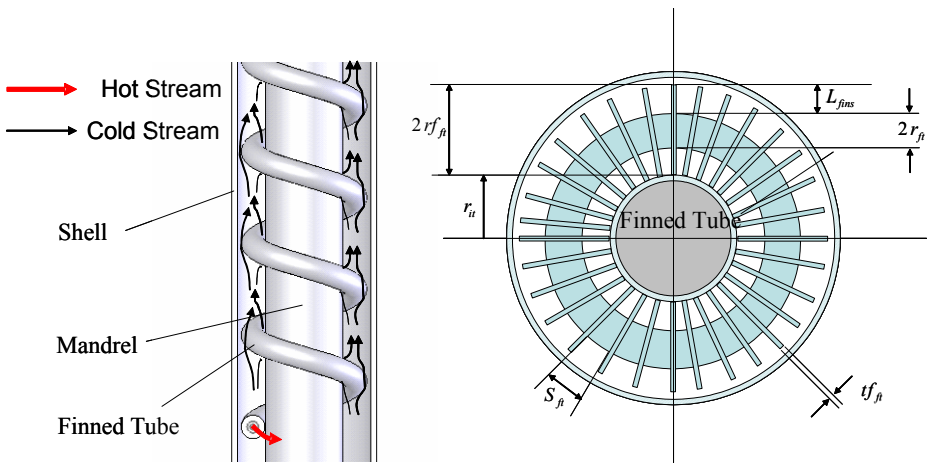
Side view cutaway (left) and enlarged end view (right) of the Hampson style heat exchanger. For clarity, the fins are not included in the side view. Finned tube geometry defined by r_{it} , inner tube (mandrel) radius; tf , fin thickness; r_{ft} , outer radius of finned tube; rf , fin outer radius; S_{fb} fin spacing; and $L_{fin} = rf - r_{ft}$, the ‘length’ of the fin.
